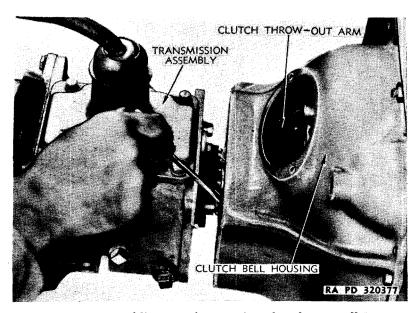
Holding Bearing Carrier Ahead to Install Arm
